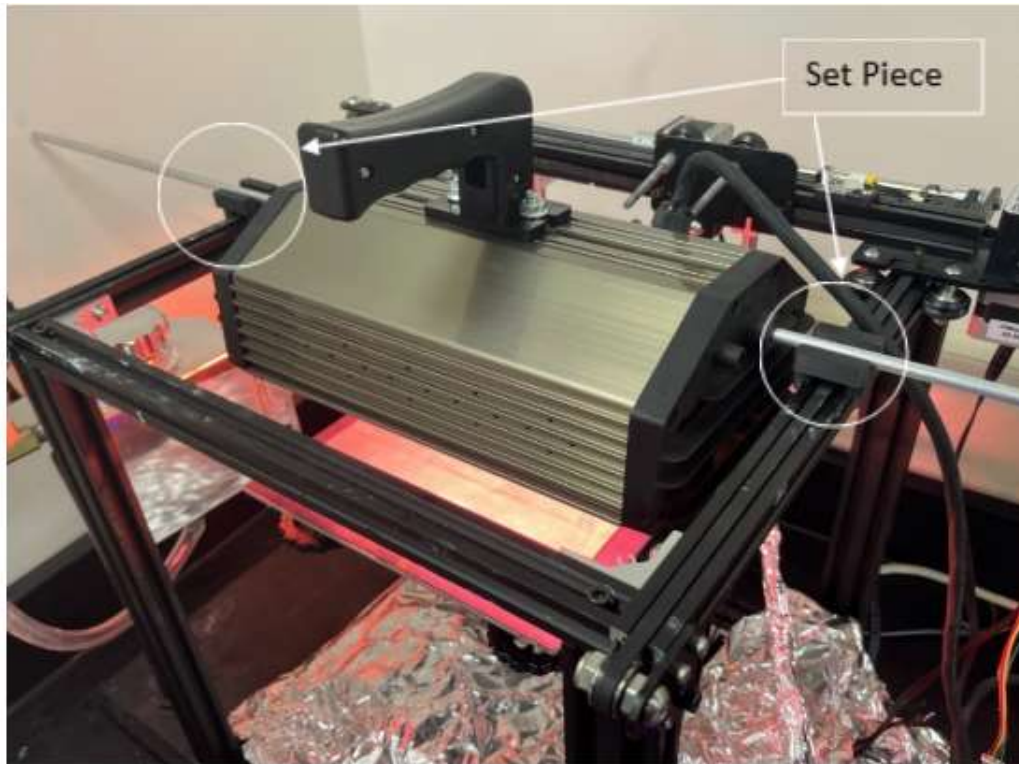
Curing setup with mounted IR lamp on top of printer using the mounting pieces.
